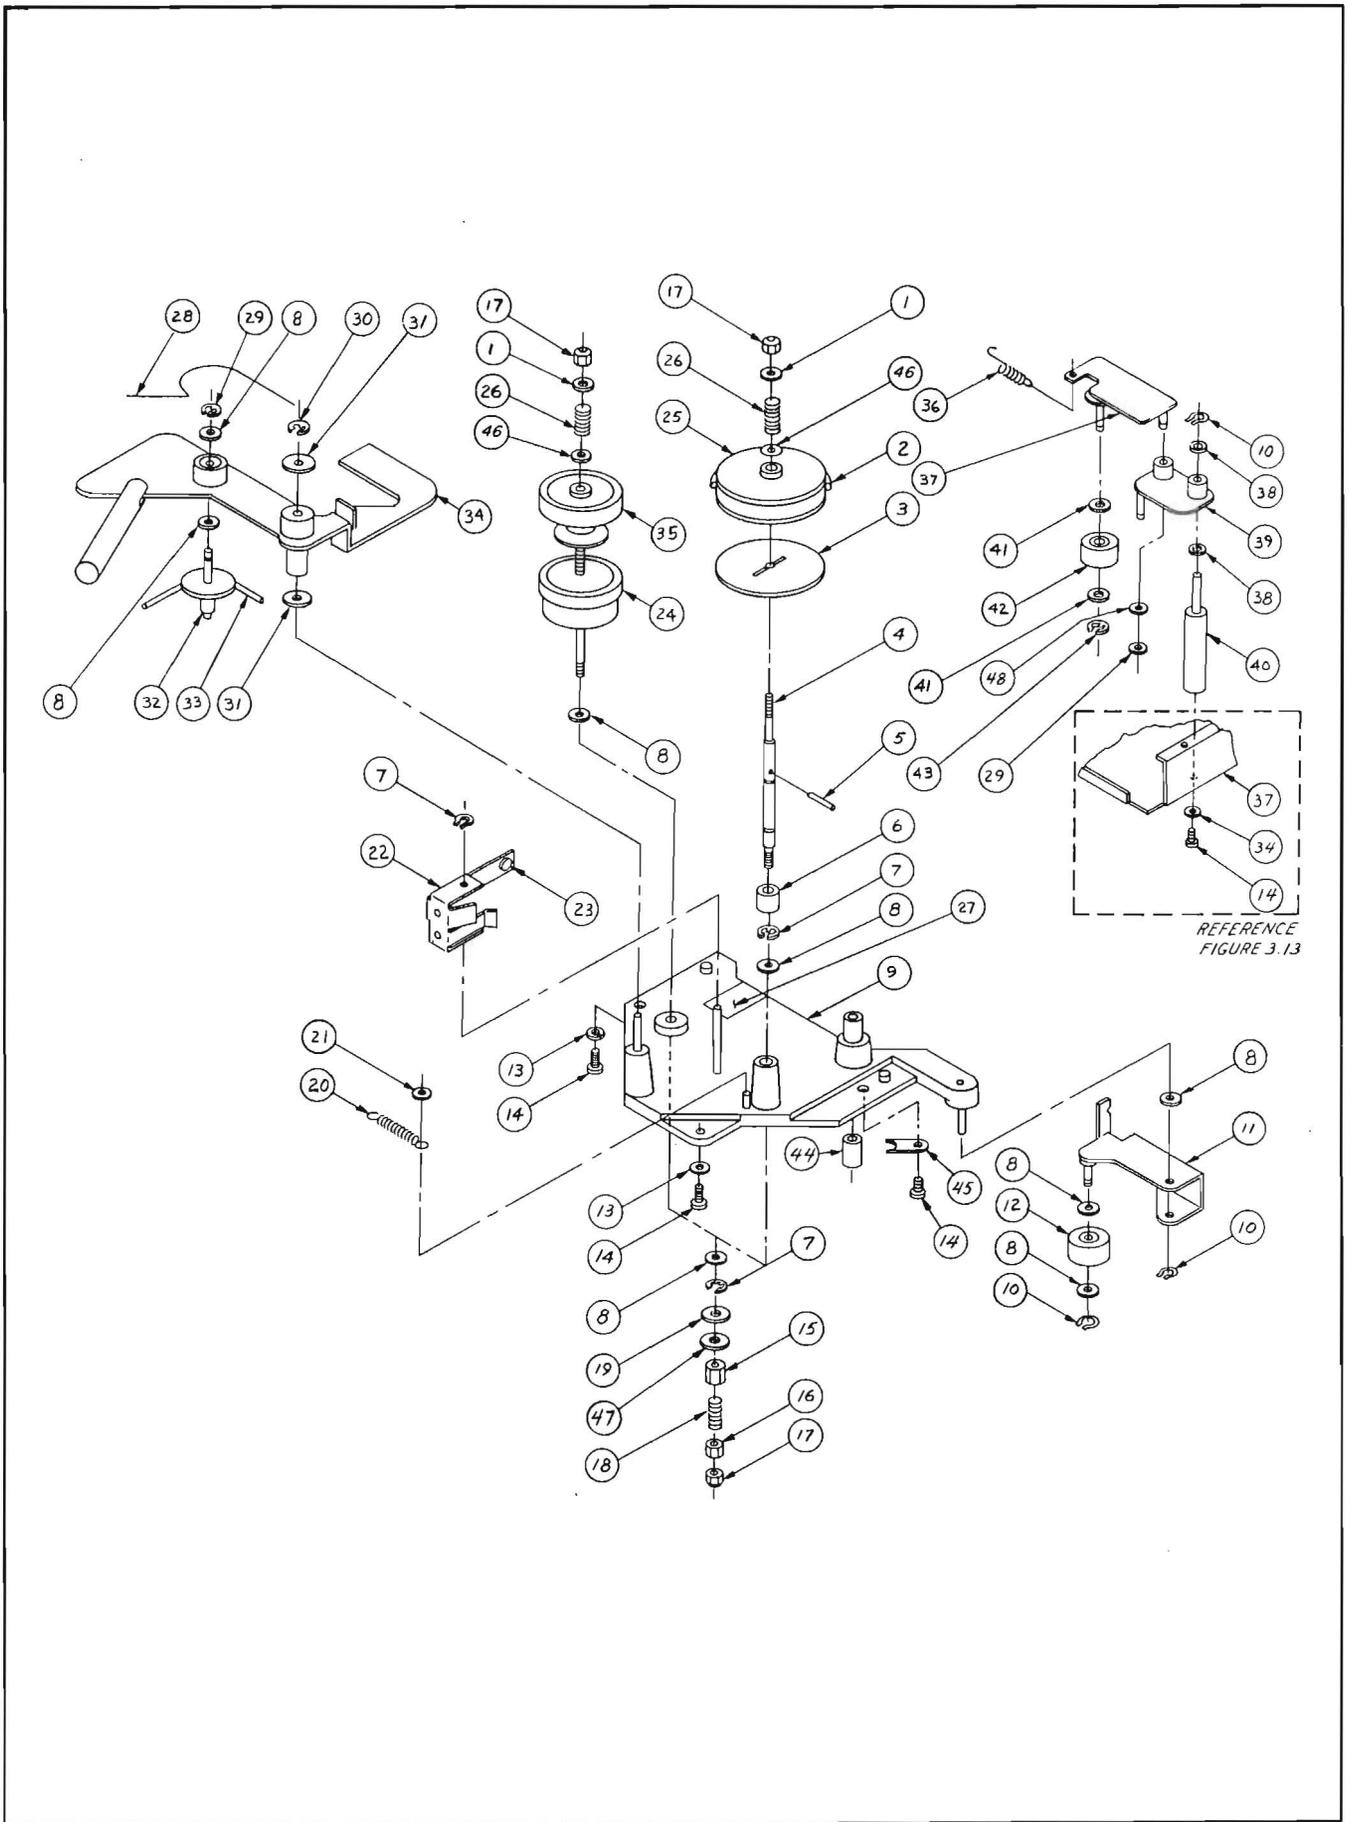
Cassette Capstan Bearing Plate Exploded View - Master Position
